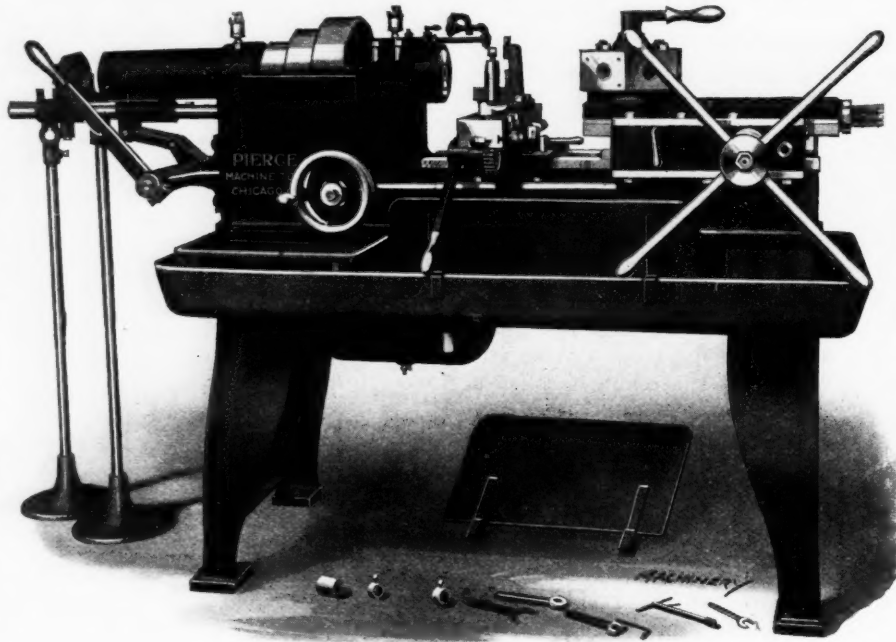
Pierce 1- by 8-inch Heavy-pattern Turret Screw Machine with Plain Head
